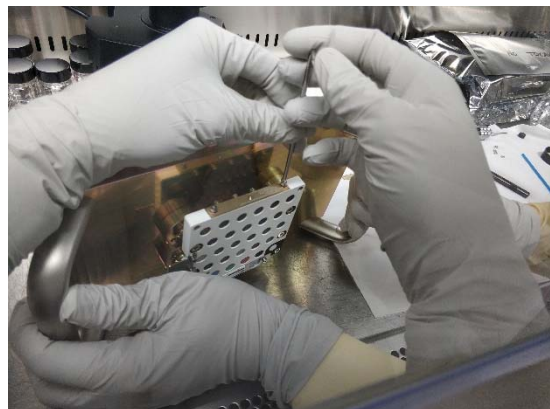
ASSEMBLY OF THE MODEL NAME PLATE
